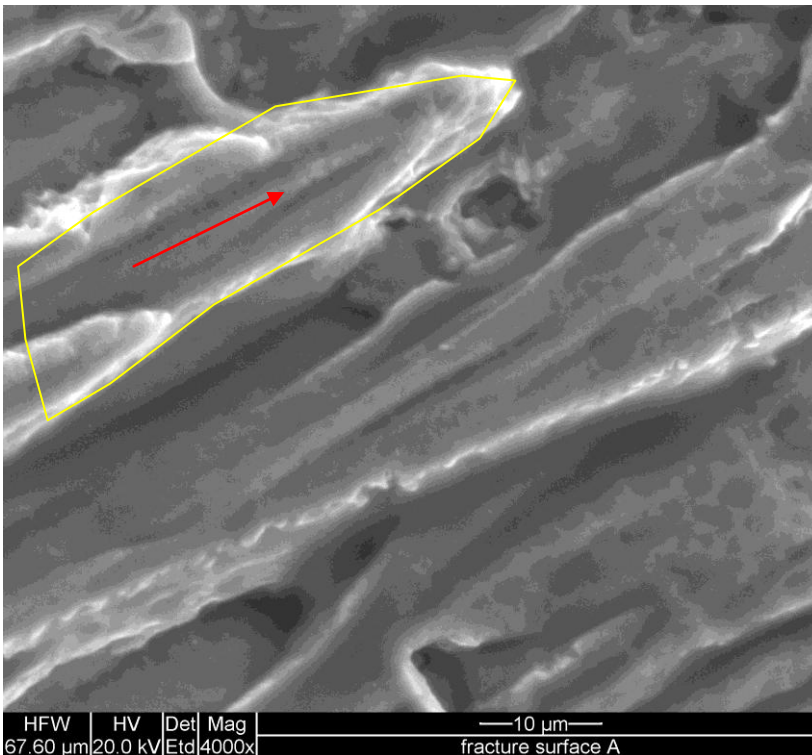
Position P4. Fatigue striations are hardly visible (yellow marking) due to chemical attack of the fracture surface.
